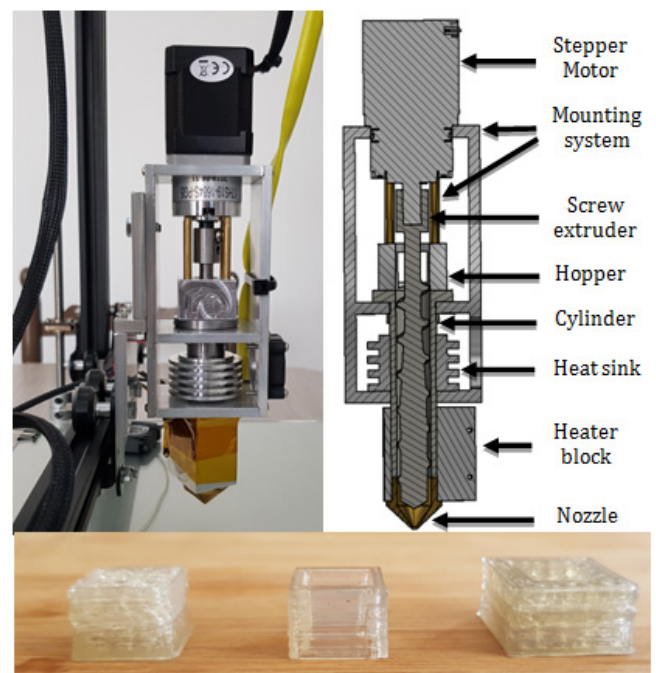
(top) Physical and labelled CAD model of the newly designed printing head and (bottom) best print results
